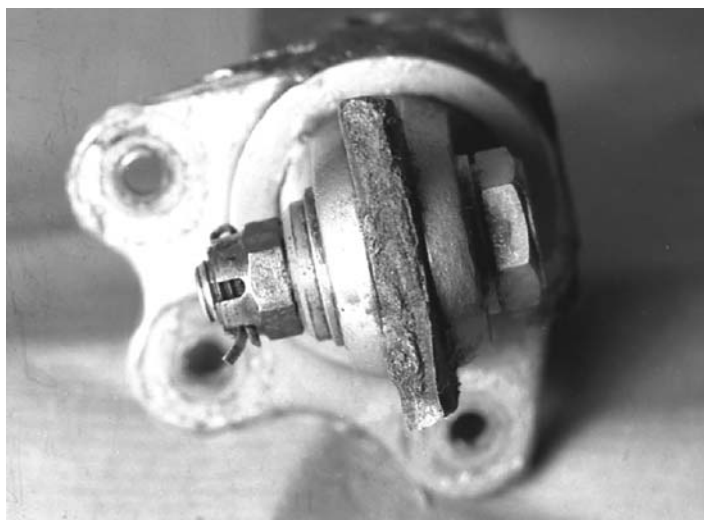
Fracture surface of the gusset plate, right-hand side
